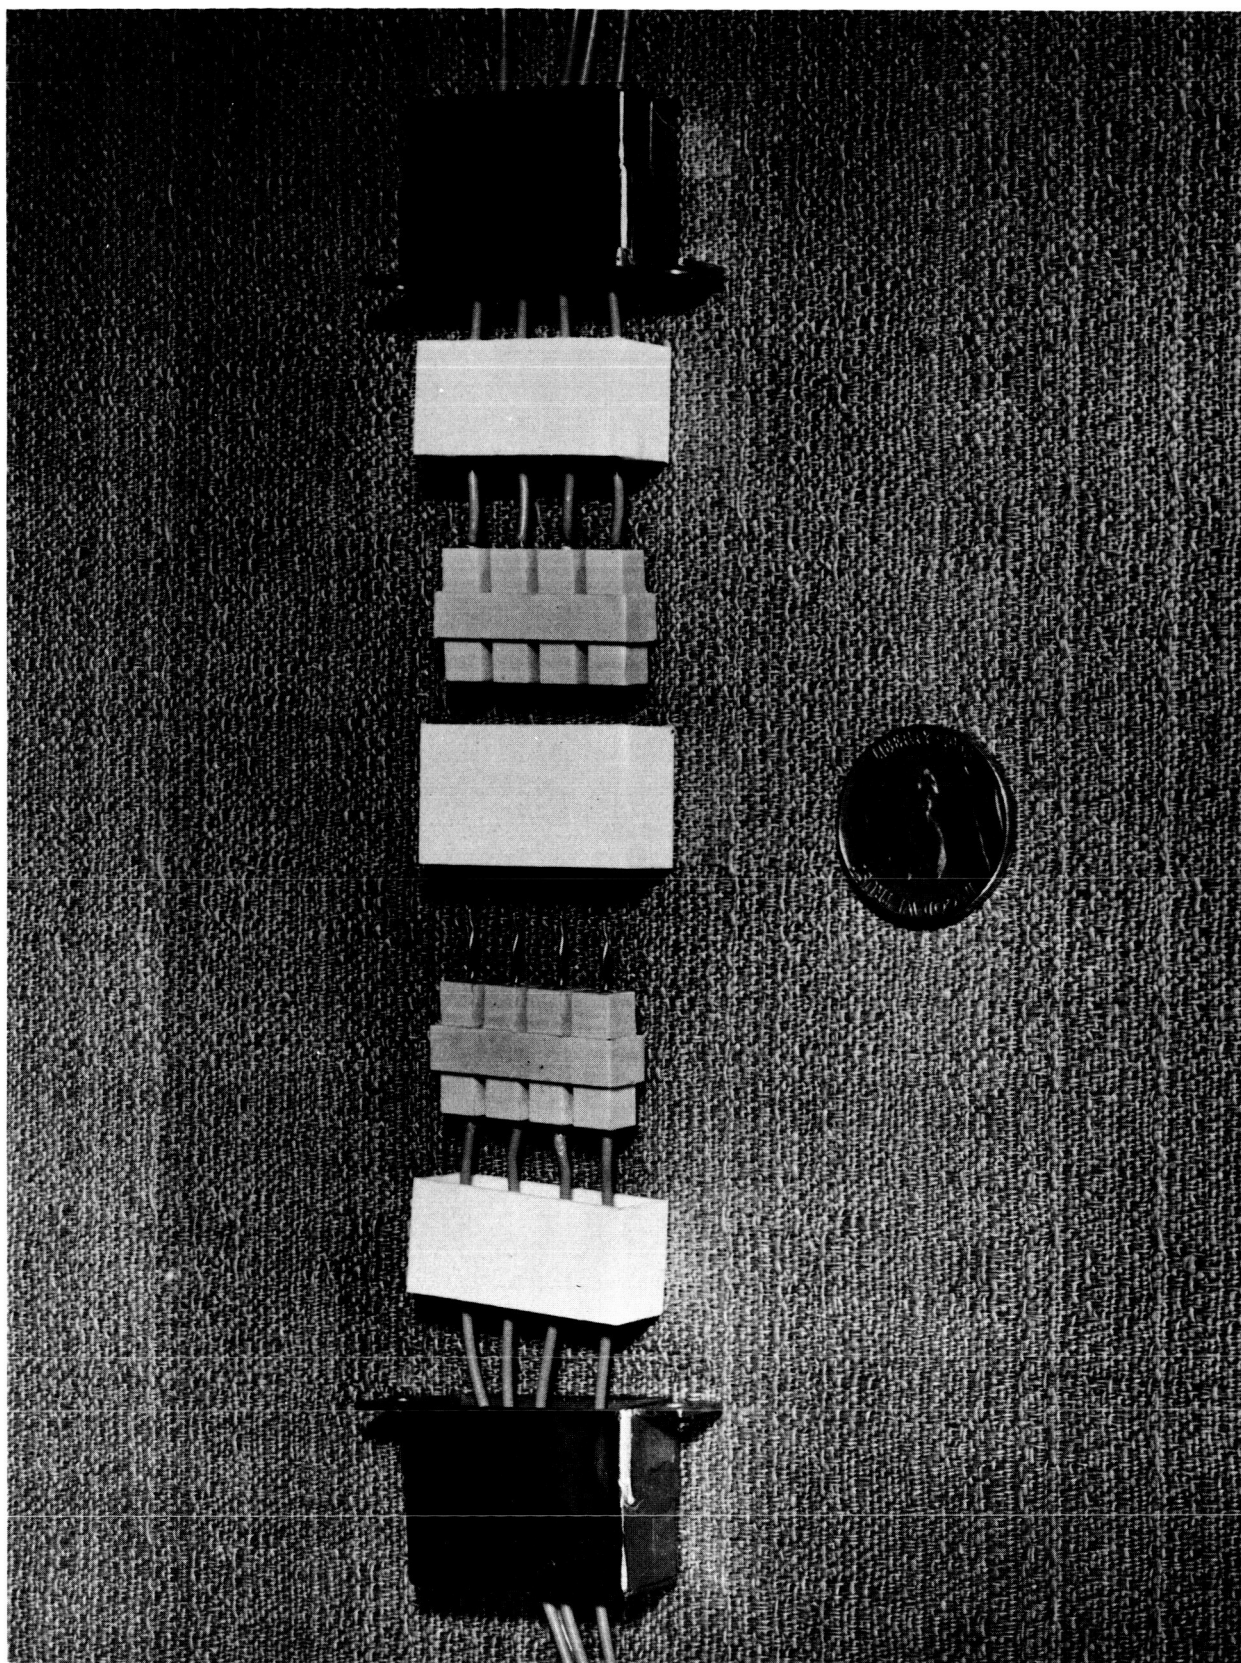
Partly assembled cryogenic connector. Pins and receptacles in place.
